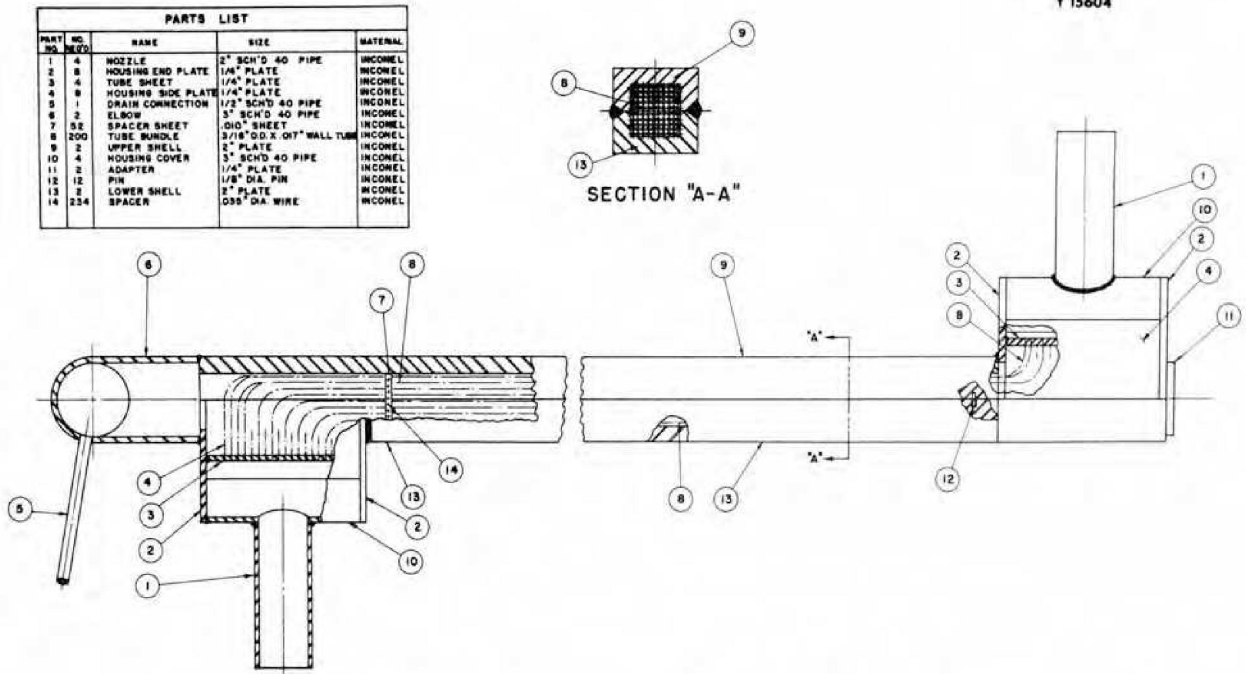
Assembly Drawing of 500-kw Fuel-to-NaK Heat Exchanger.
